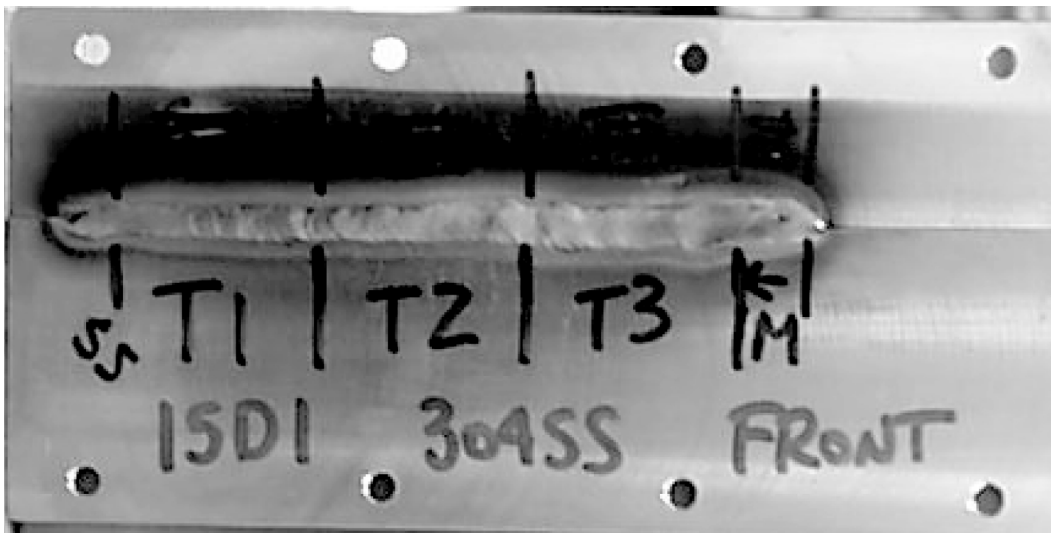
304 SS fillet weld (sample 1-5-D-1).
